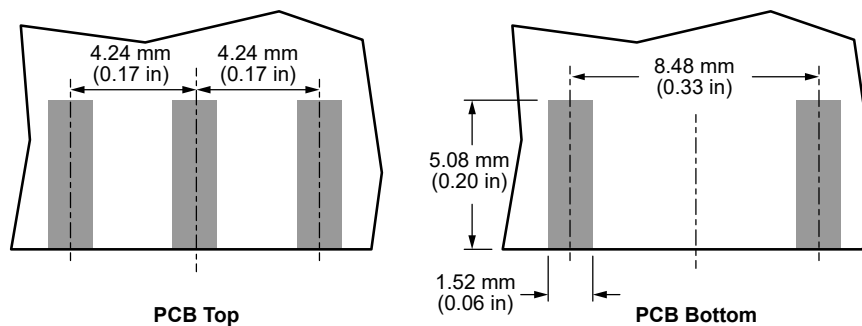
Recommended PCB Dimensions for the CONSMA020.042-G
